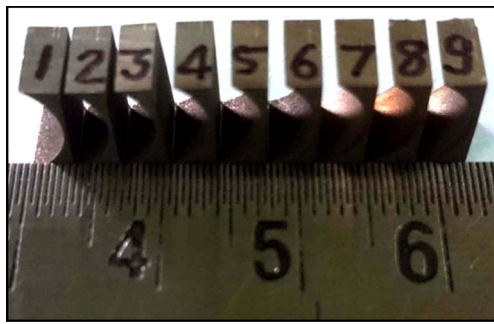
Curved profile of Inconel 706 machined by the WEDM process
